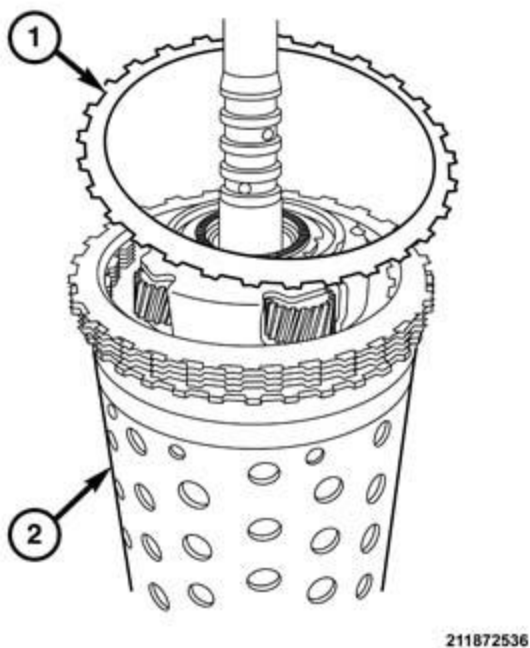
Annulus Assembly & B-Clutch Wave Plate
